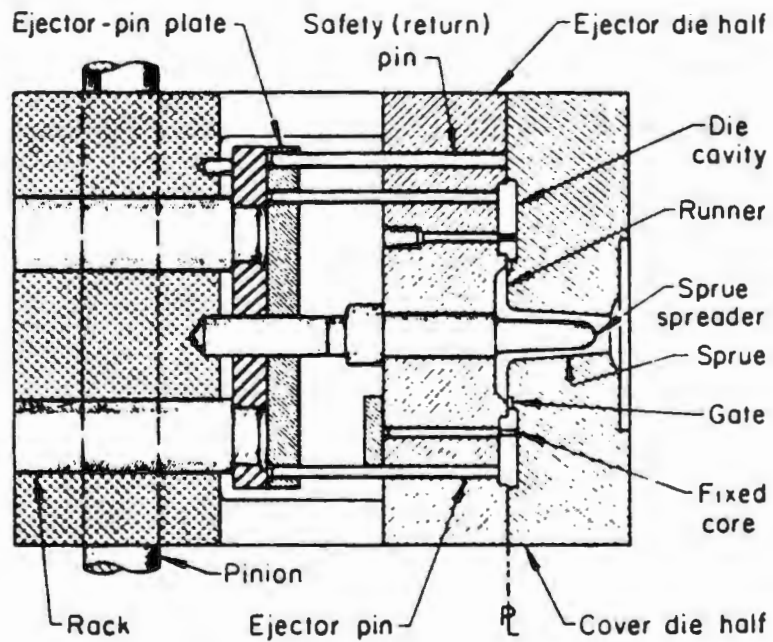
Principal Components of a Simple Hot-Chamber Die Casting Die with Integral Rack-and-Pinion Ejection (Reprinted from [12])
